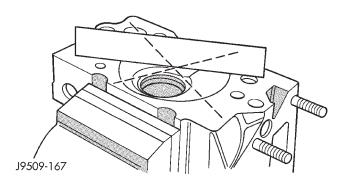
Checking Cylinder Head Flatness ROCKER ARMS AND PUSH RODS
